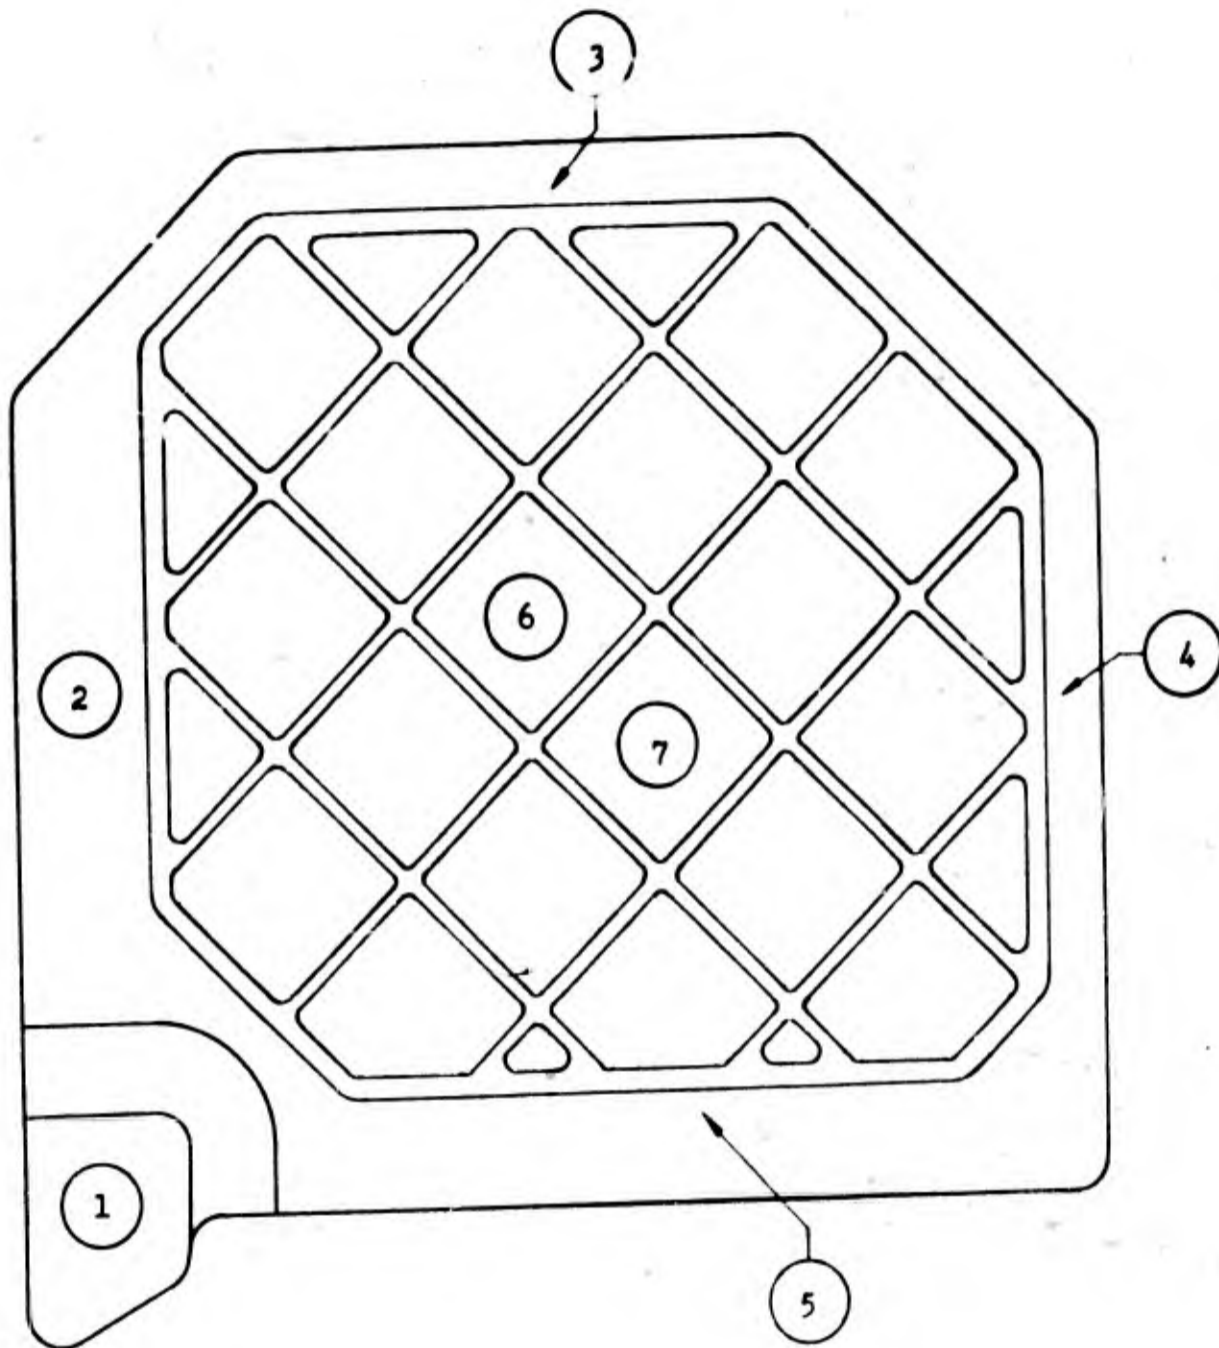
Location of Web Thickness Measurements (Ref. Table III)
